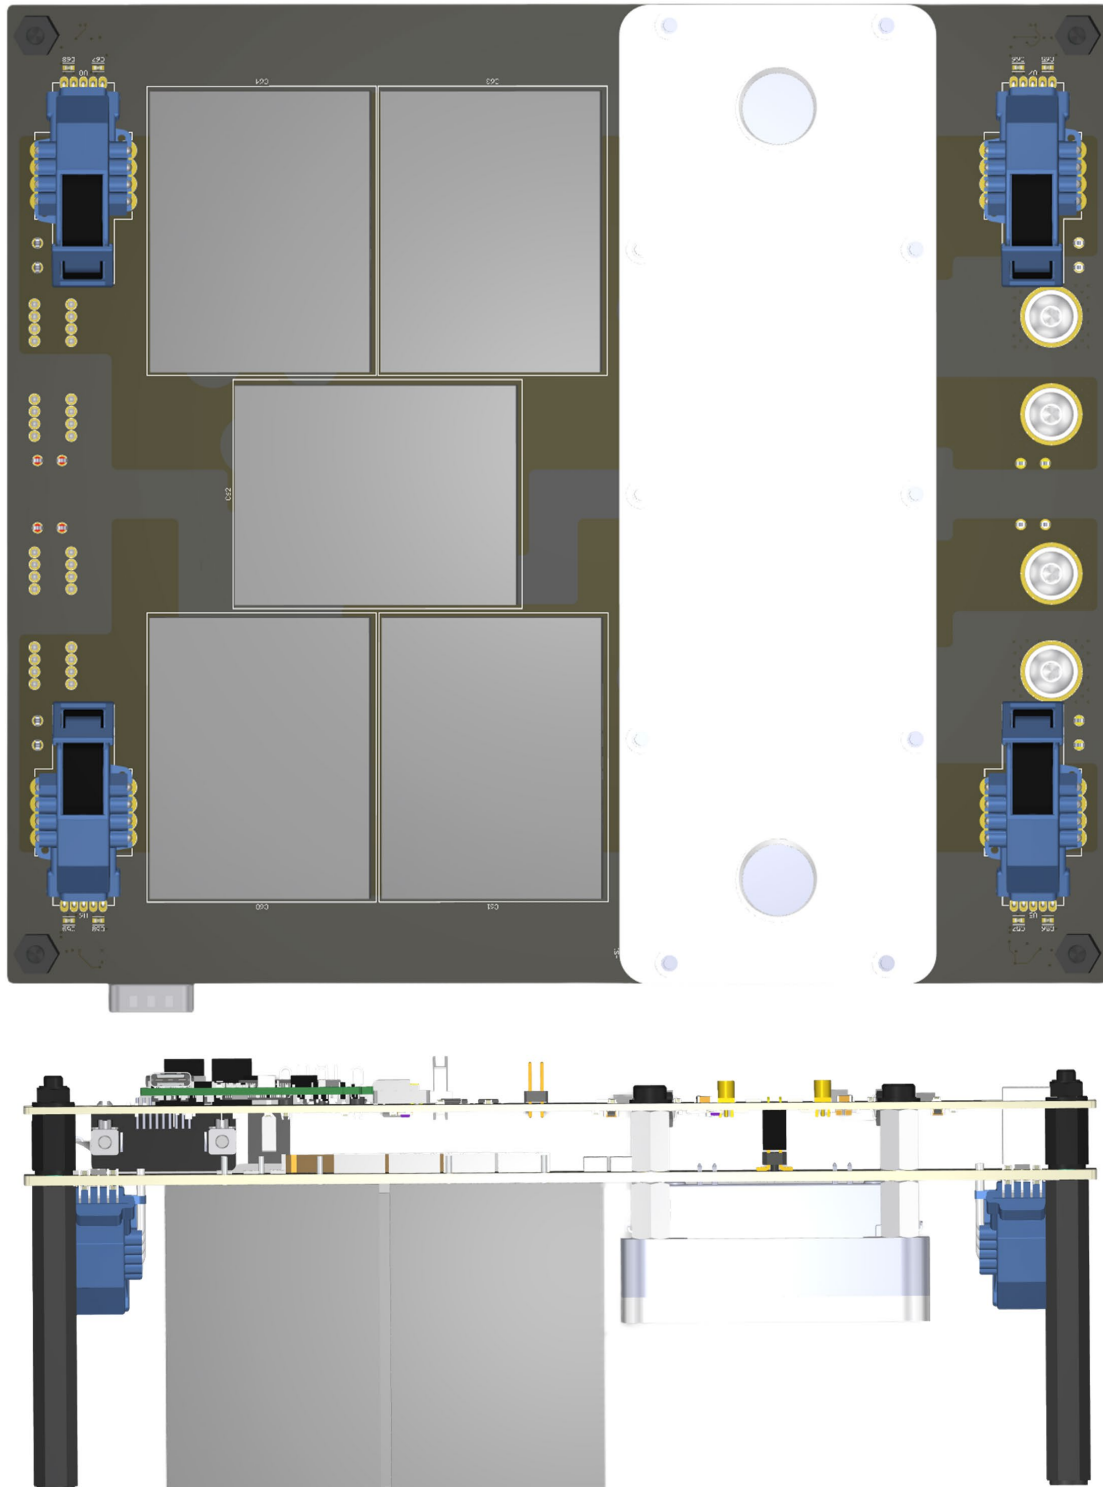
CRD60DD12N-GMB full assembly renderings - bottom and side views
